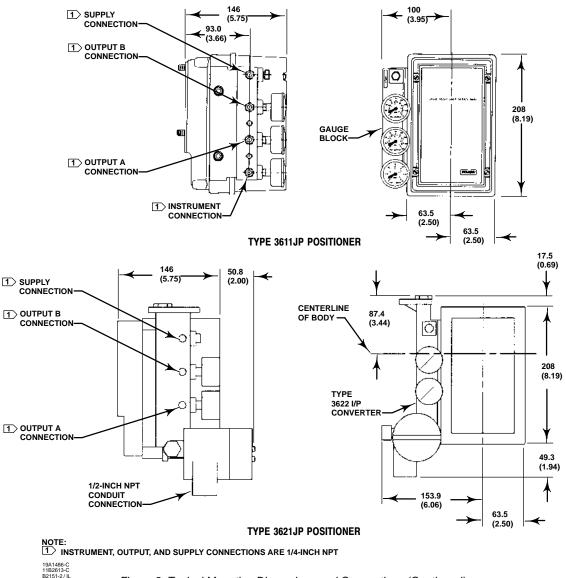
Typical Mounting Dimensions and Connections (Continued)
